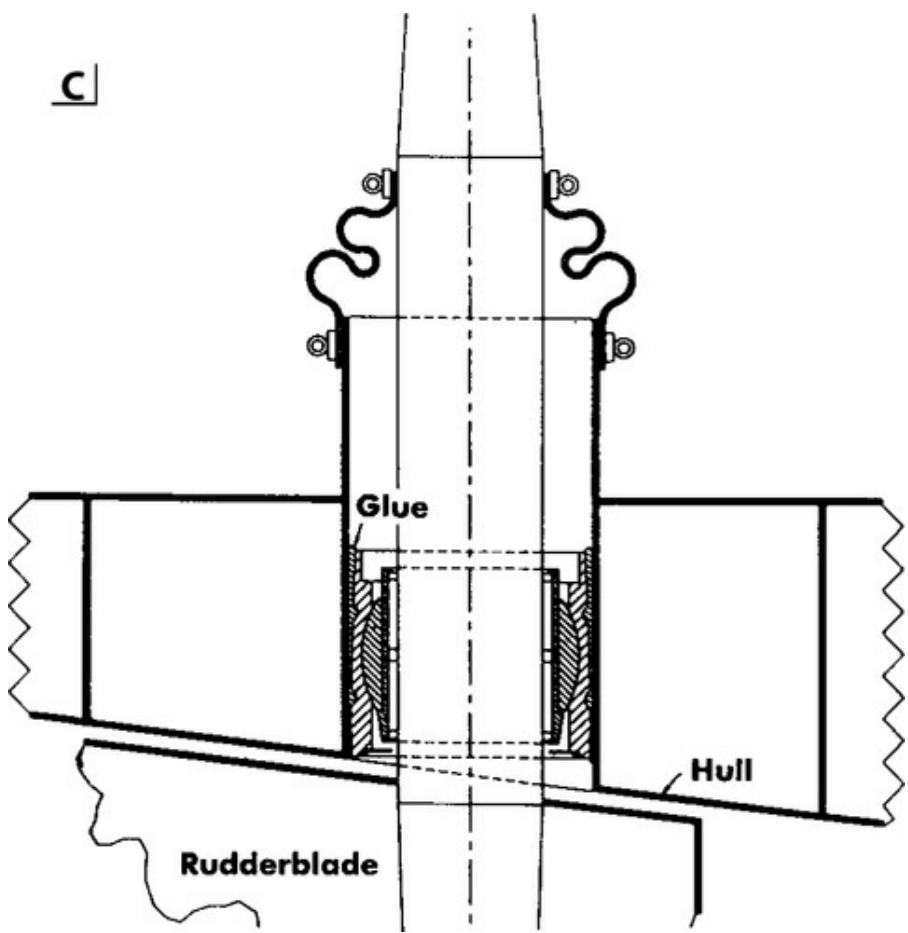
C. A self-aligning bearing. The bearing is contained in a housing that has a conical surface. This housing seats in a corresponding
